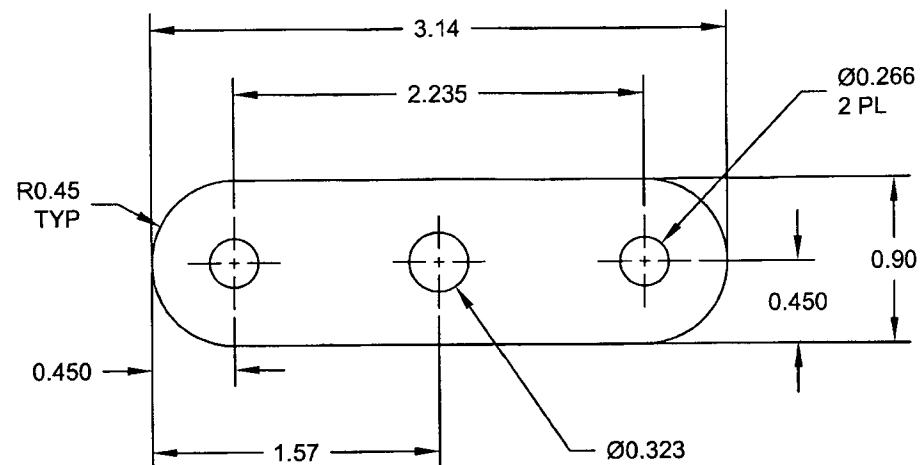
DETAIL D: HOOP & HINGE PLATE DETAIL
